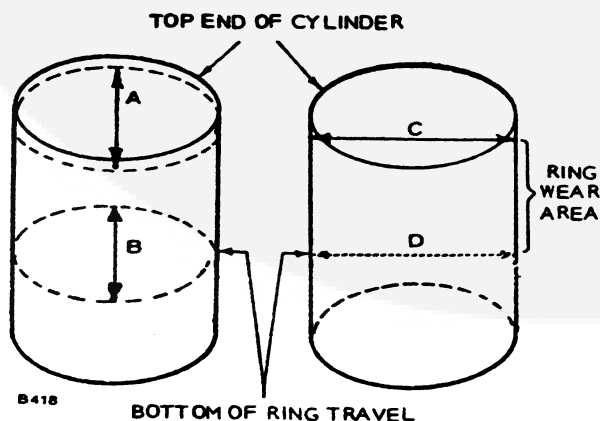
METHODS OF CYLINDER BORE INSPECTION
